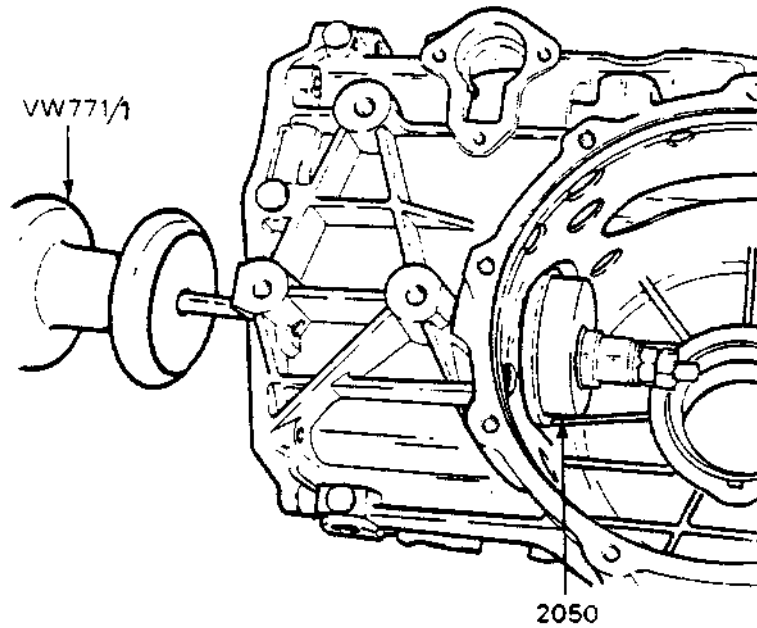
Removal of Pinion Shaft Bearing Race and Shim
